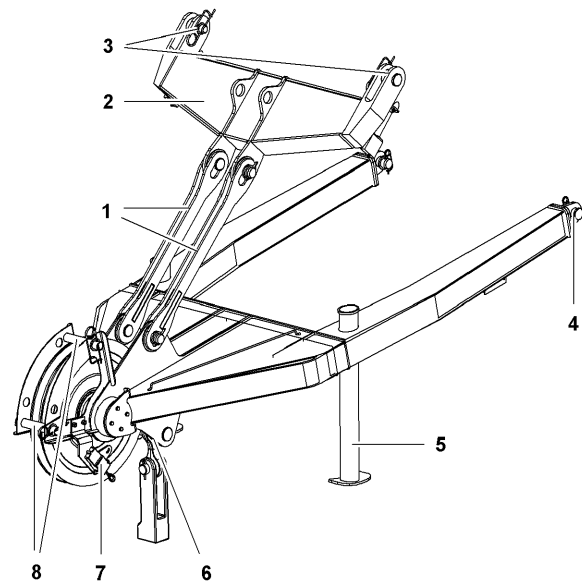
Auxiliary jib (36 t (79.300 lb)) for the boom head section
